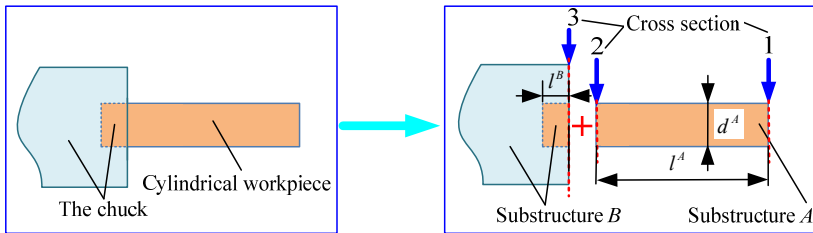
Receptance coupling model of cylindrical workpiece-chuck assembly
